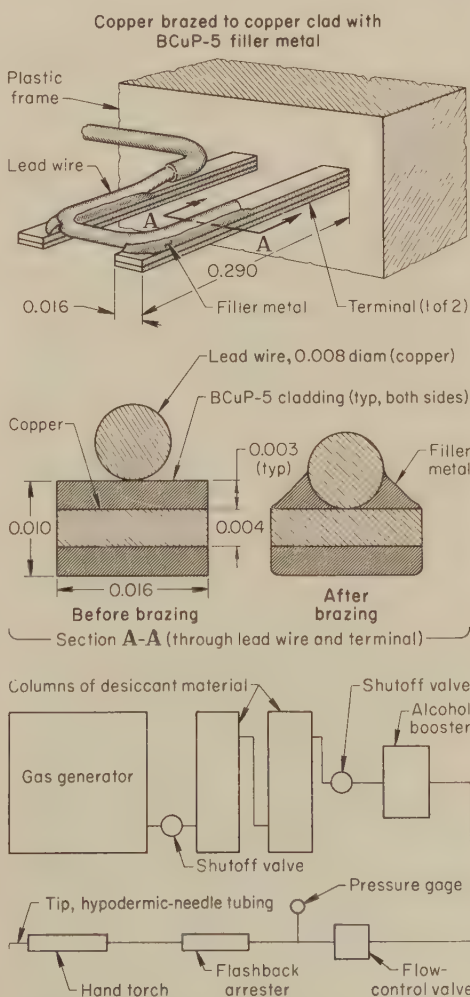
Assembly of a lead wire and terminals that was brazed with a special oxy-hydrogen torch and self-fluxing filler metal, sectional views of the joint, and schematic of equipment layout (Example 648)
